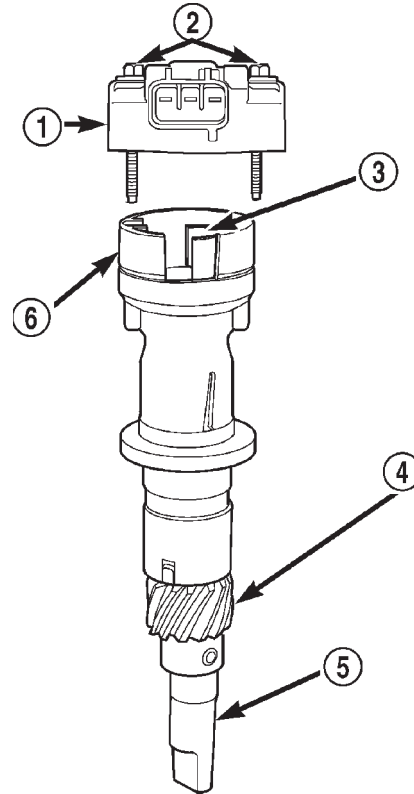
CMP and Oil Pump Drive Shaft—4.0L Engine
